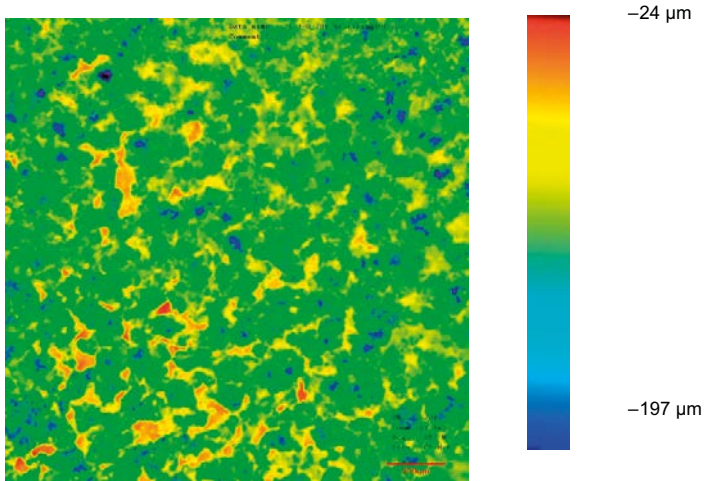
Weld (retreating) on copper material 52/3. The imaged size is 2.6×2.6 mm.
